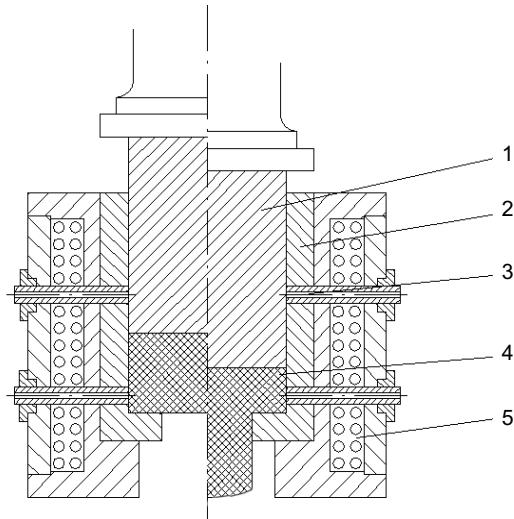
Extrusion rig: 1 – punch, 2 – die, 3 – thermocouples, 4 – billet, 5 – heating system
